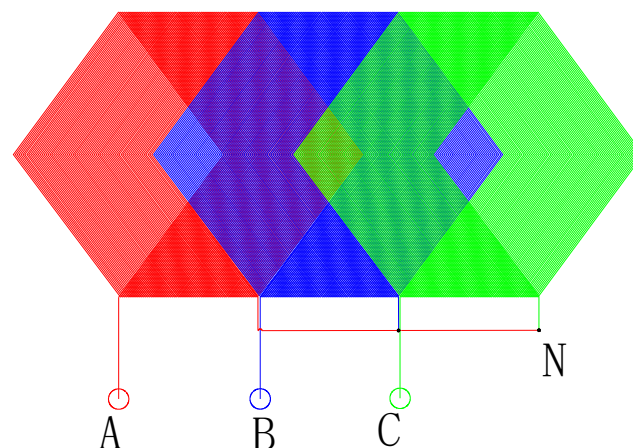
Stator part of high-speed PM slotless brushless DC motor winding layout.
